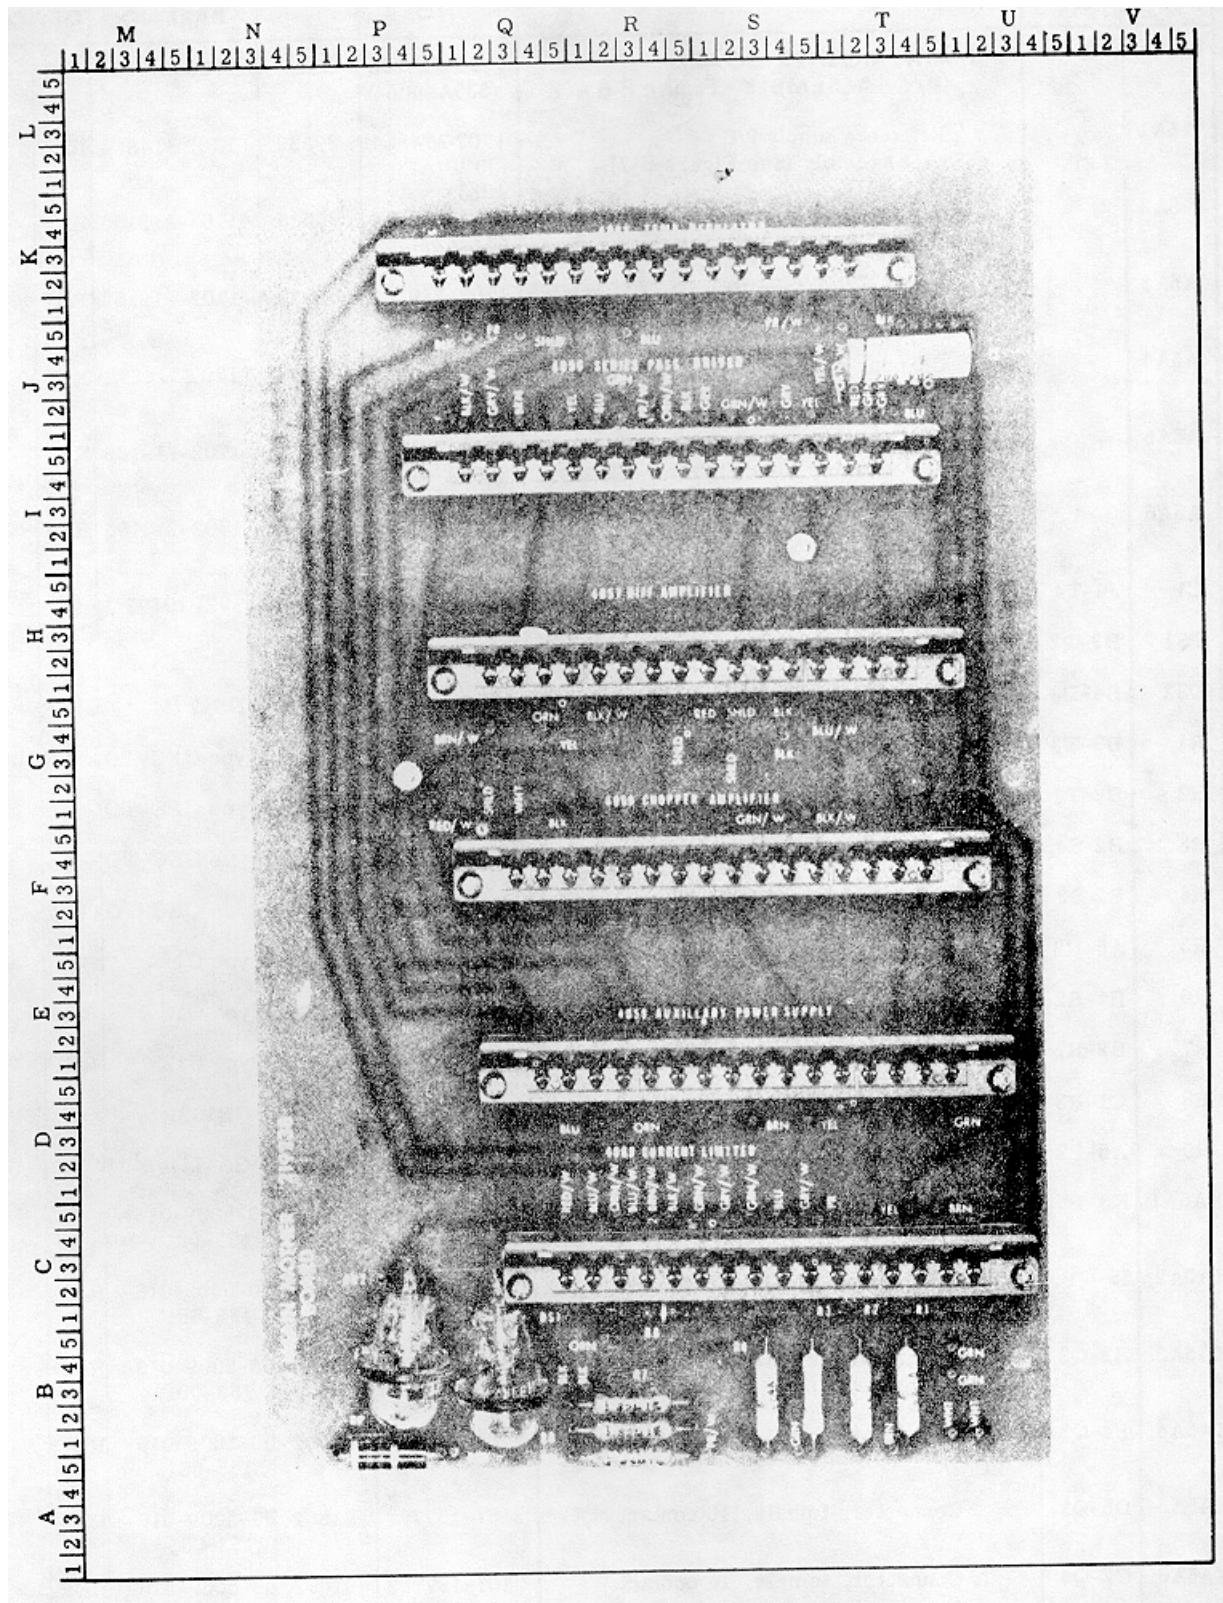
MAIN MOTHER BOARD P/C ASSEMBLY
